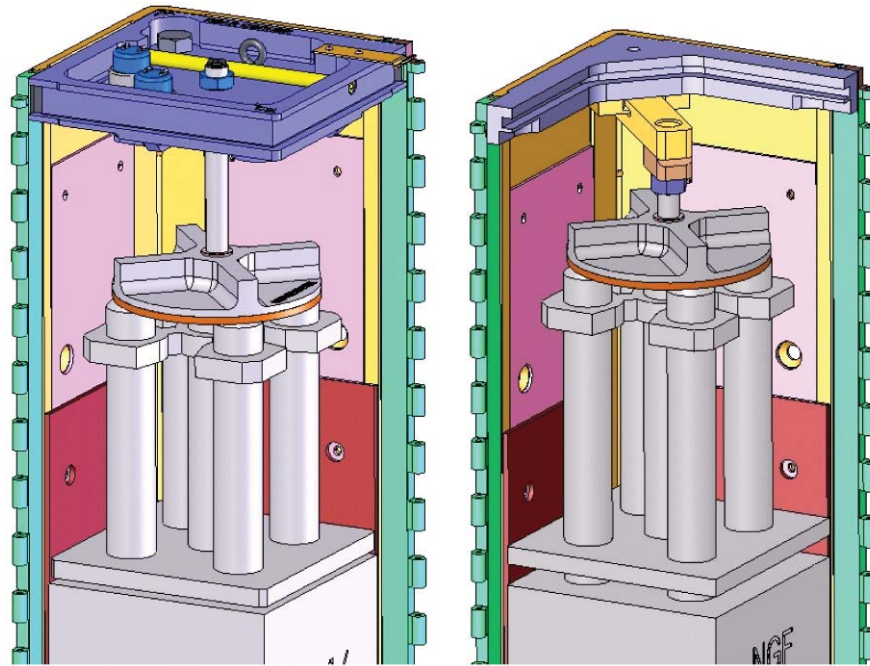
B Center Plate Axial Restraint – Removable Top Plate (left), Fixed Top Plate (right)
